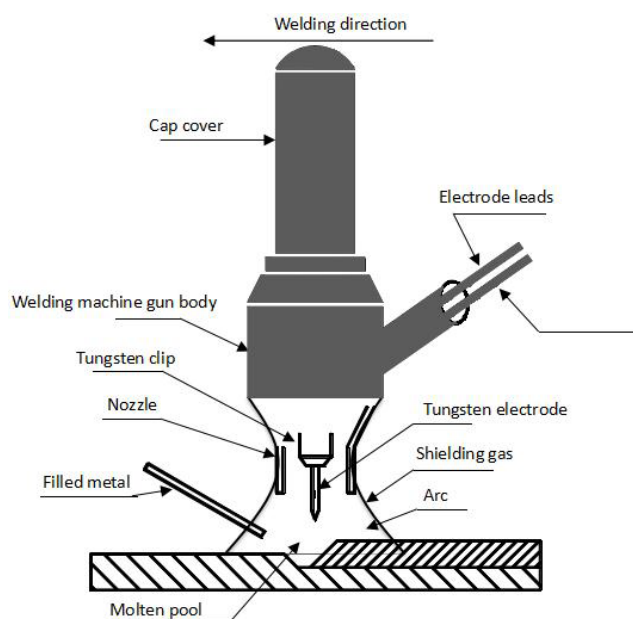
Schematic diagram of GTAW welding process.
